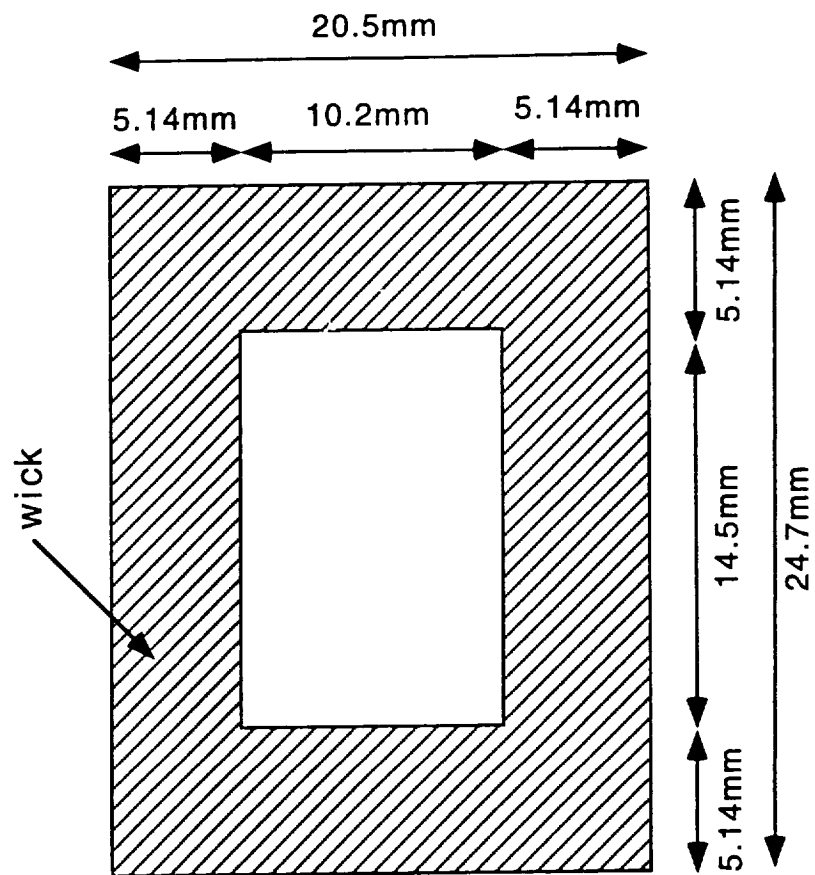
Dimensions for the 24.7 mm wide rectangular geometry.
